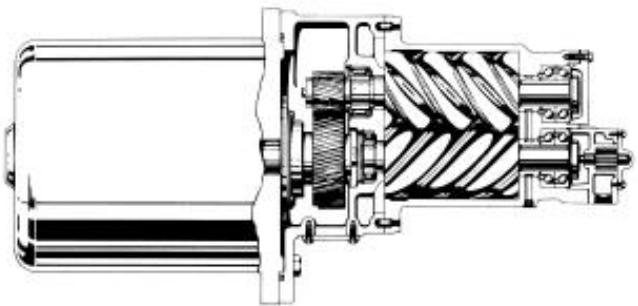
Single-stage screw compressor. (*Courtesy of Ingersoll-Rand Co., Washington, New Jersey.*)
